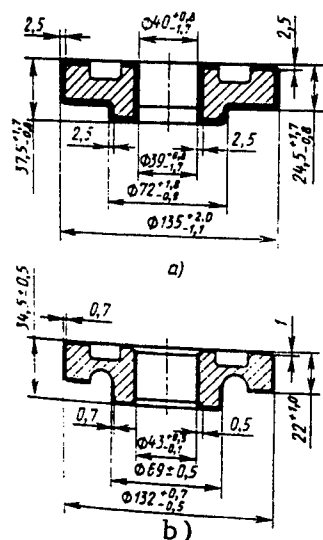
Gear Wheel Forgings Manufactured by Hot Die Forging (a) and Semihot Forging (b)
